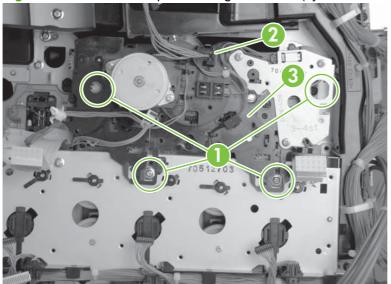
Remove the print-cartridge drive unit (cyan and black)
